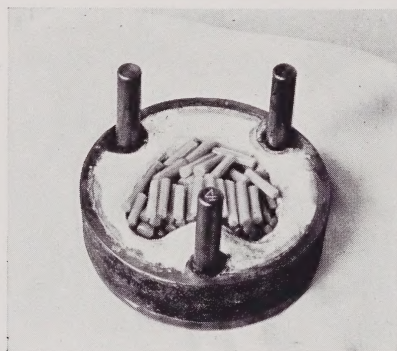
The female part of the mould packed with glass cane in short lengths.
